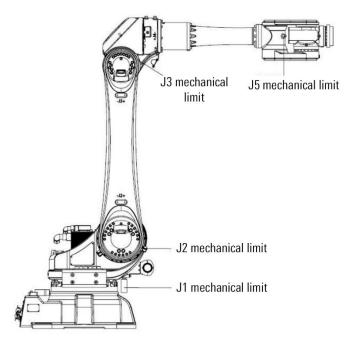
AIR50-2700/AIR80-2560 mechanical brake
